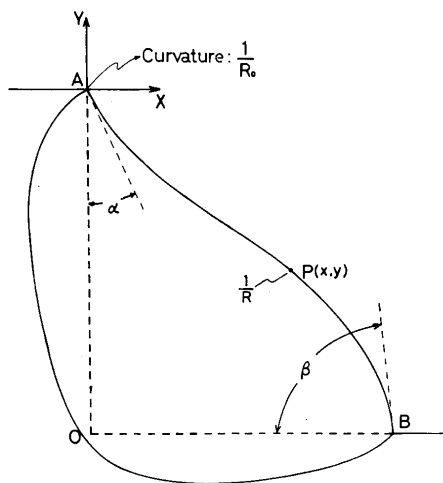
Two-dimensional model of molten pool in horizontal fillet welding⁹⁾
